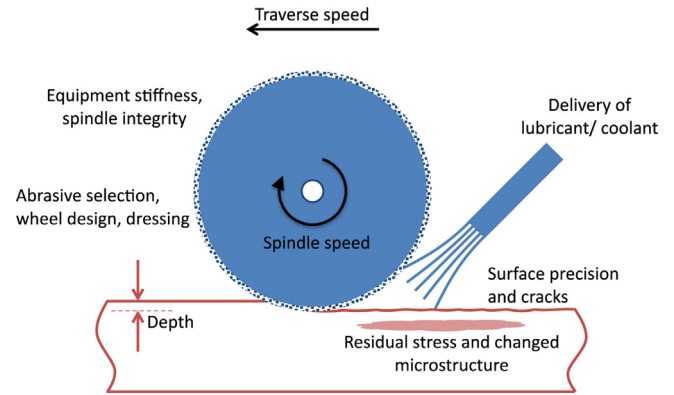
Speed limits in grinding arising mainly from inadequate heat control lead to inaccurate workpiece geometry with various surface defects.
